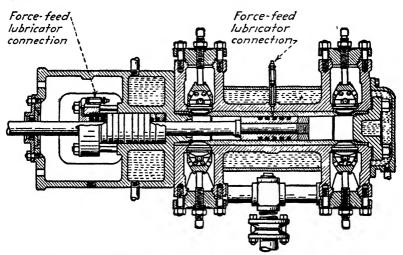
Lubricating connections to cylinder and piston-rod packing.
